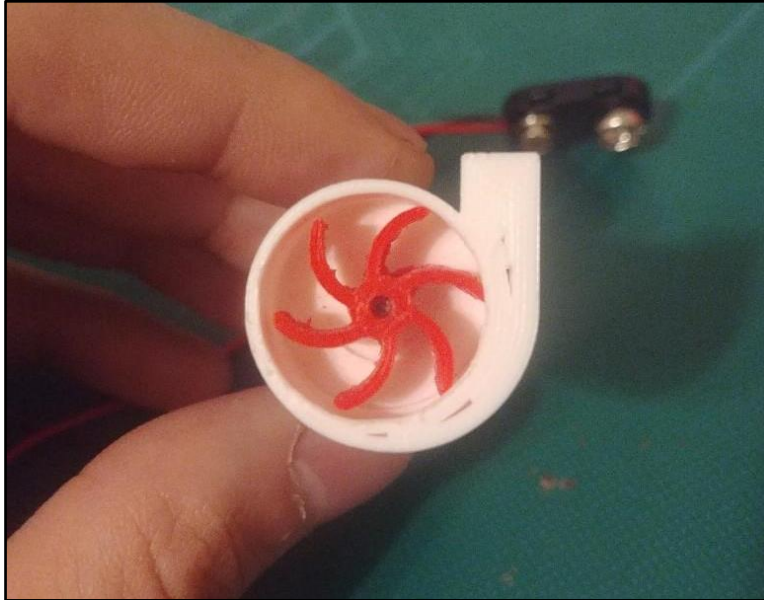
PLA Prototype for 6 Blade Centrifugal Impeller Pump
